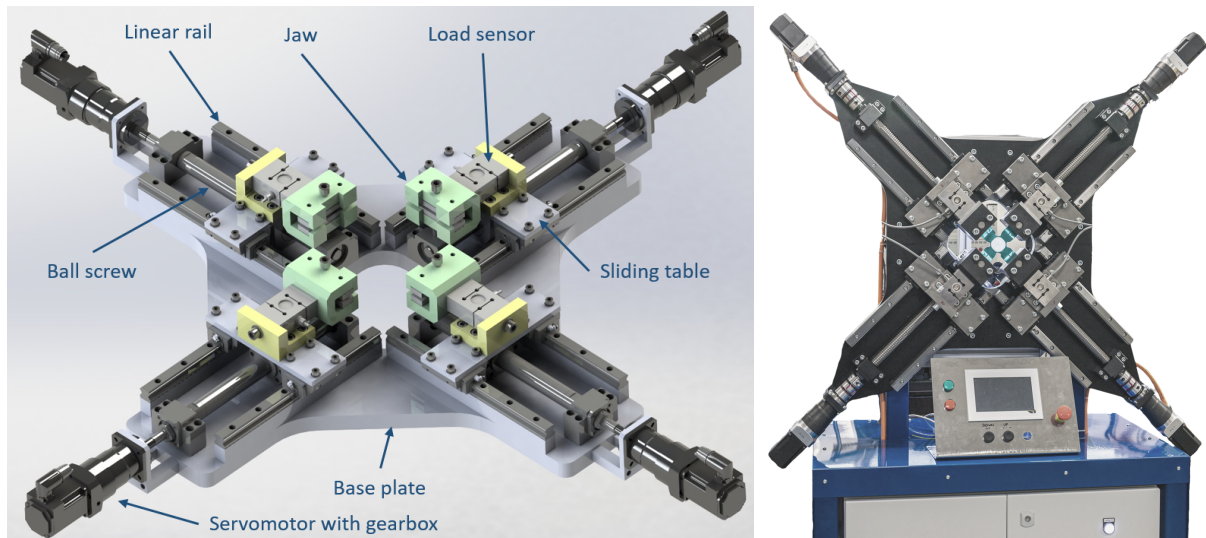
Biaxial testing machine: CAD model scheme and real machine
